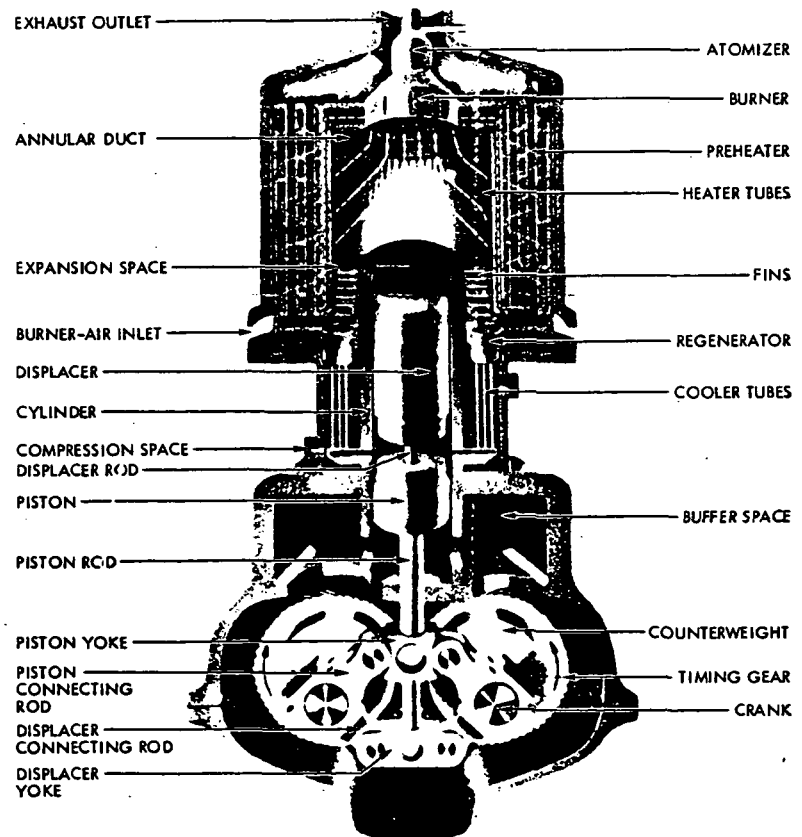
(b) Piston displacer with rhombic drive (Ref. 6-5)
